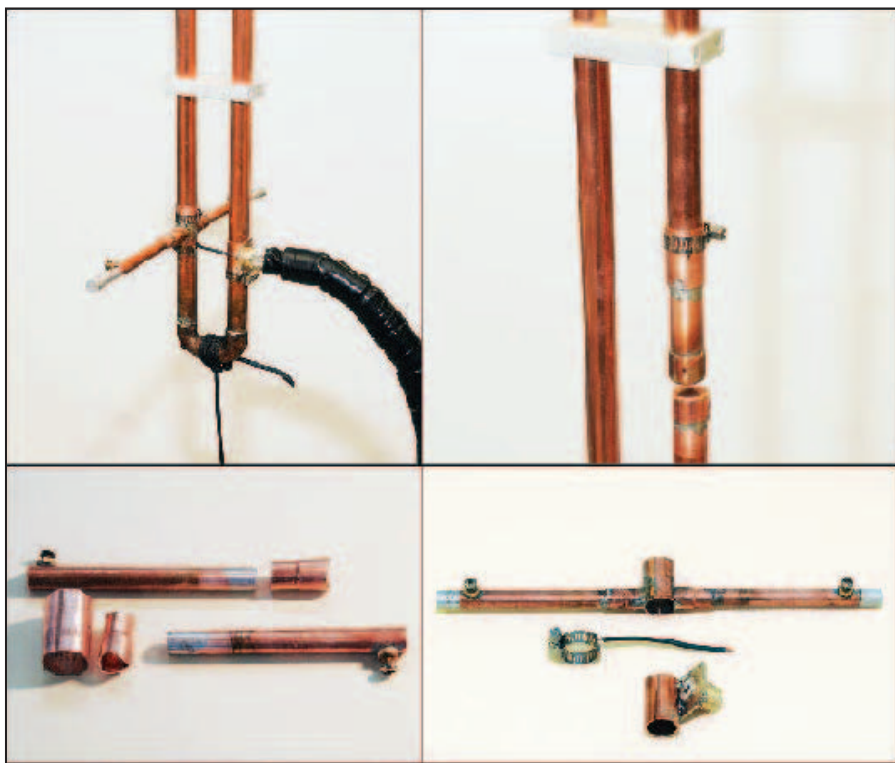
The crossarms were fabricated of copper pipes and fittings, cut and filed to shape and soldered using a propane torch. The SO-239 chassis mount jack was soldered to a split straight coupling and the feed wire from the coax is attached to a stainless pipe clamp. The upper split arm is made variable using a straight coupling and clamp. End caps are used to increase the capacitive coupling between the sections for tuning.
